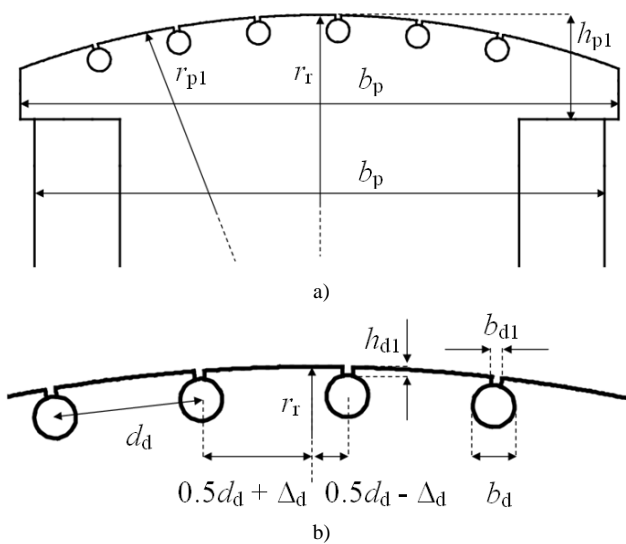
Dimensions of a) the pole shoe and b) the damper winding.
